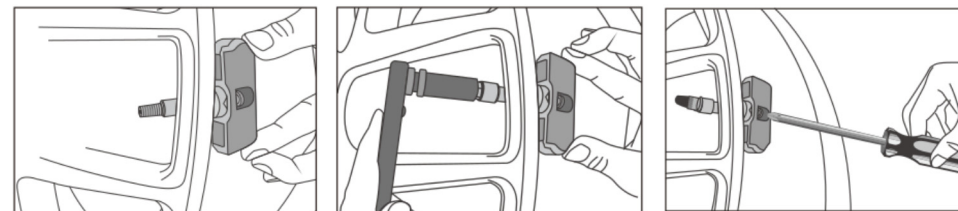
Secure the sensor to the metal valve stem and torque the screw to 1.48 Ft-lbs (2 N-m).
